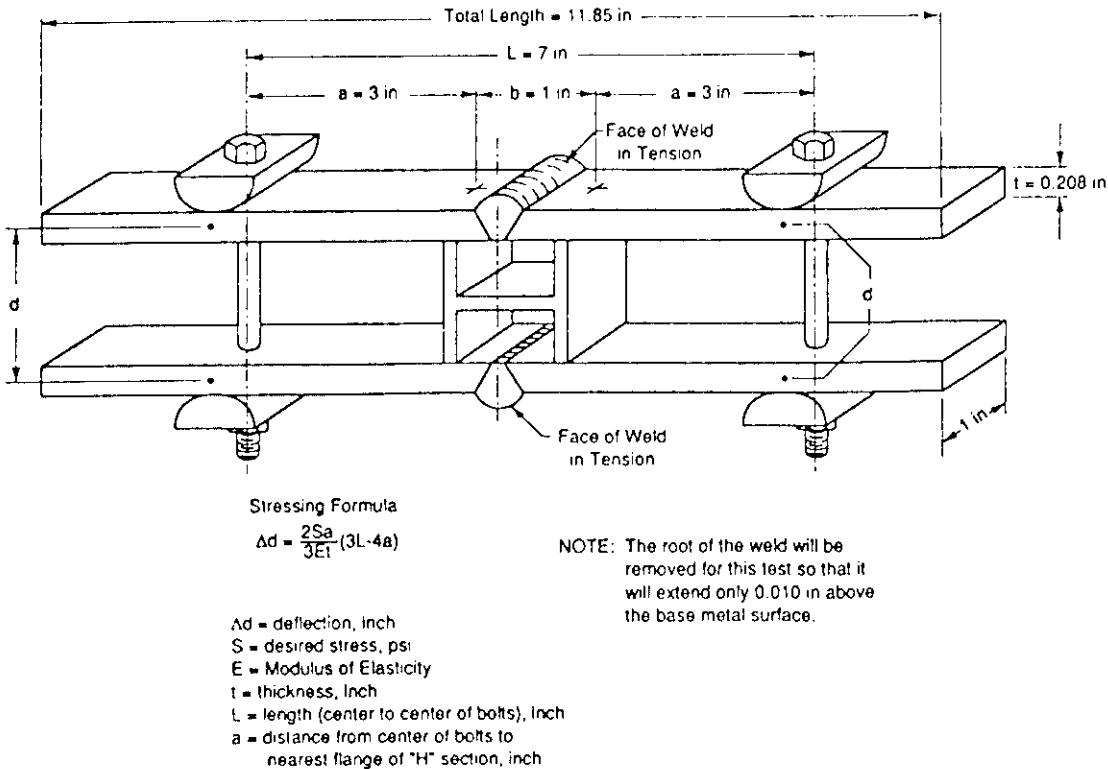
Bent-Beam Stress Corrosion Assembly with a Typical Bead on / Root off VPPA Test Weld Specimen. Testing is done as per NASA TM X-53483.
